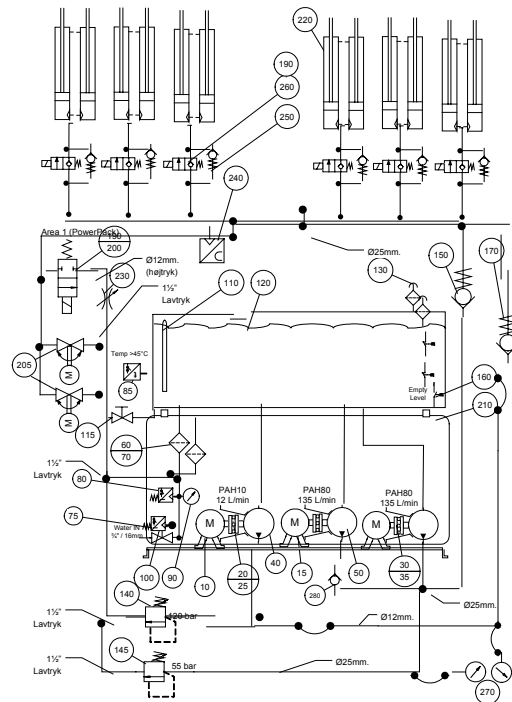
Water hydraulic drives for wing press equipment for an aero plane factory
